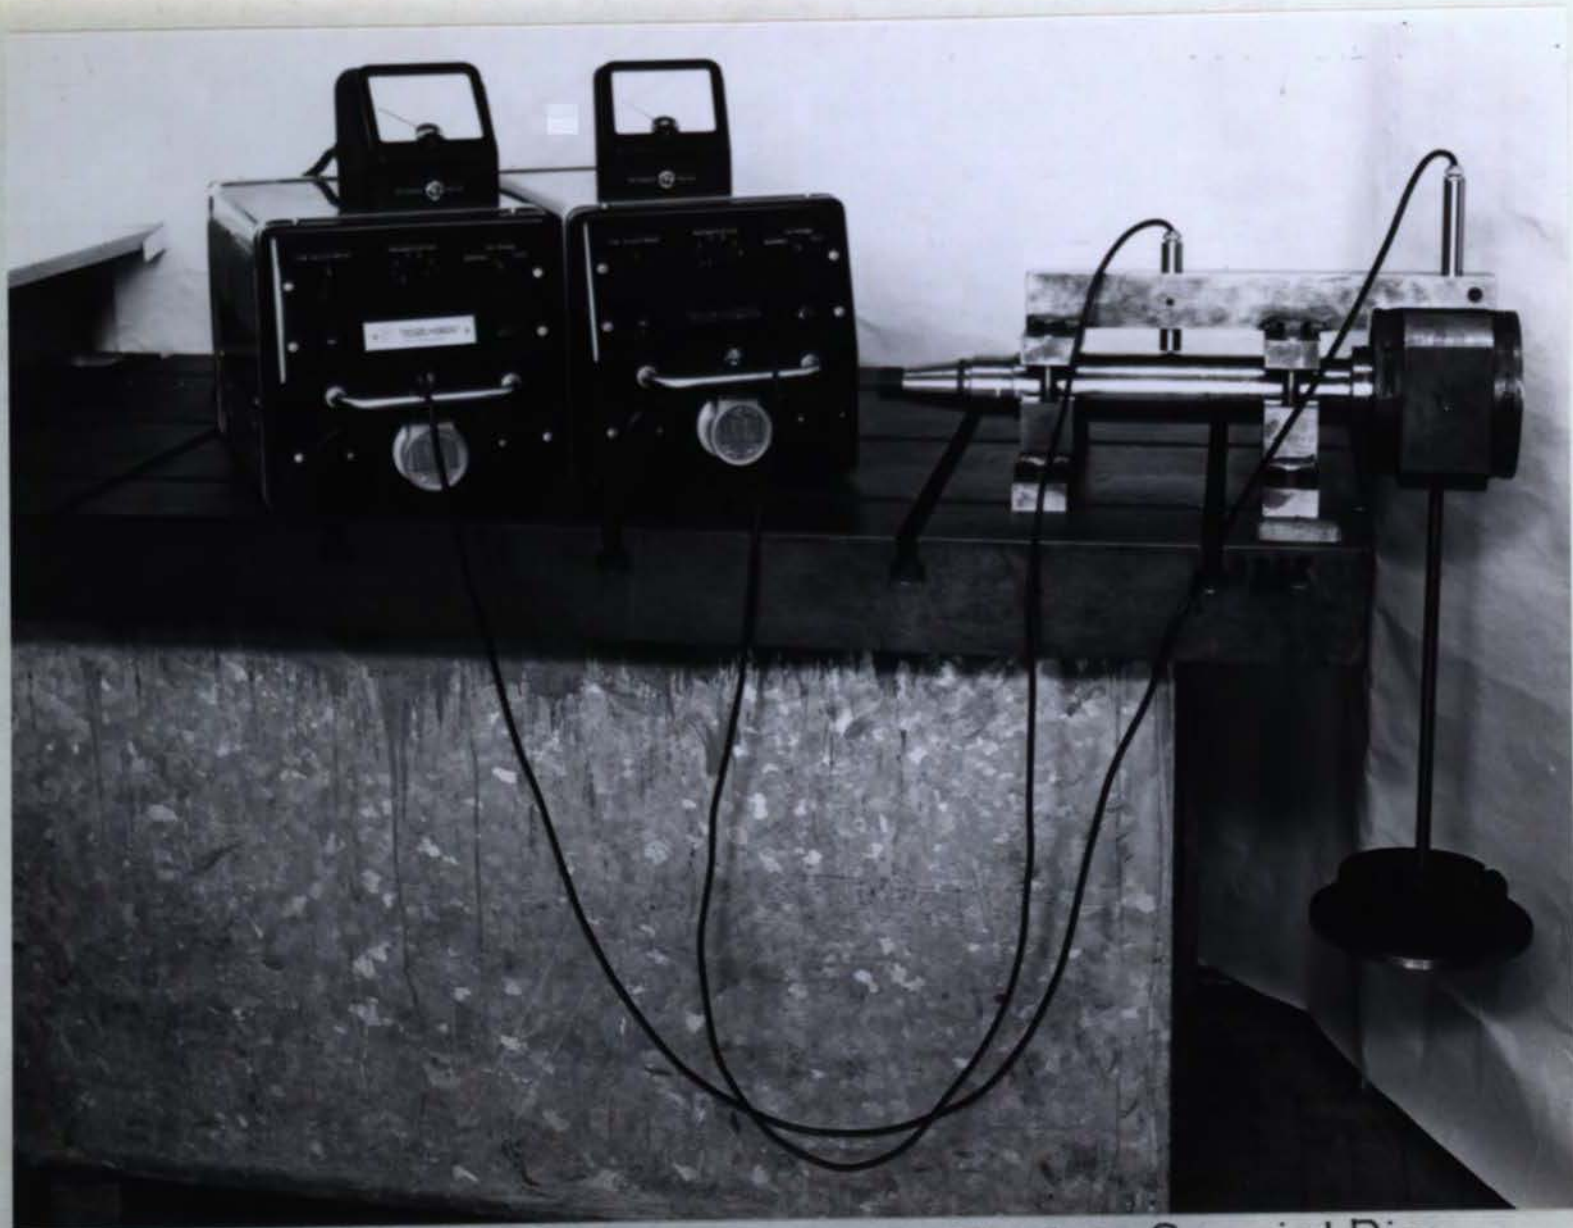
Grinding Wheel Spindle: Static Test in Special Rig.
